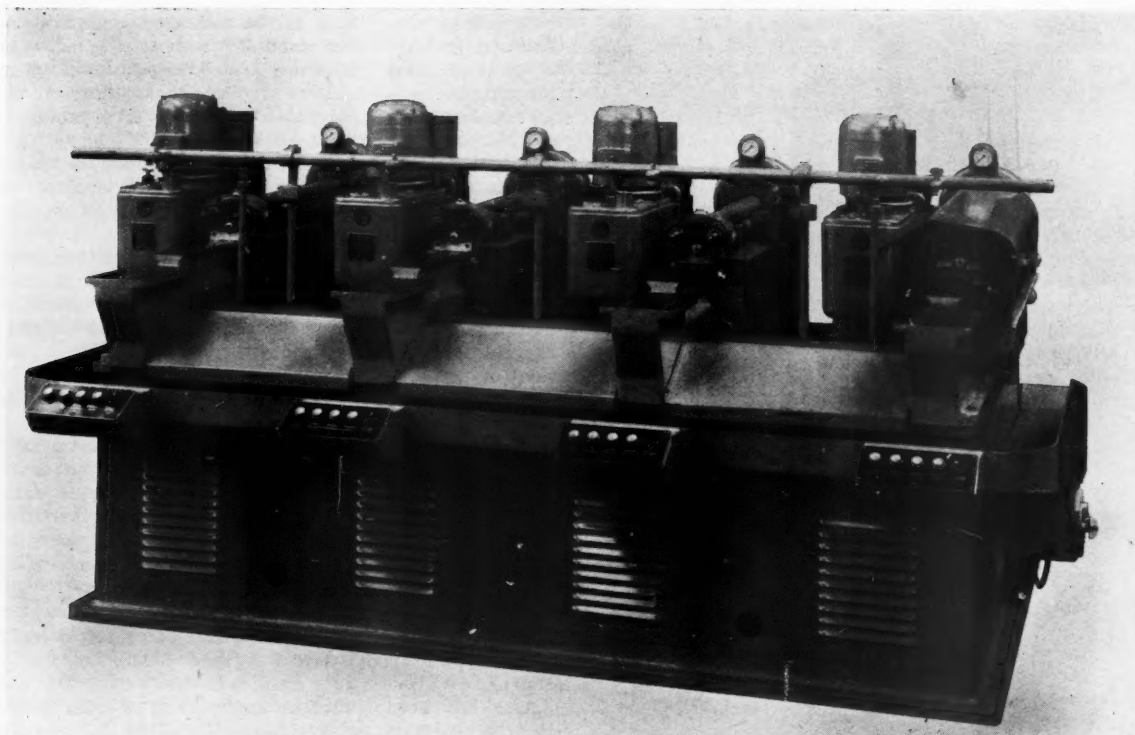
Special Archdale deep hole drilling machine. Eight connecting rods are drilled simultaneously.
